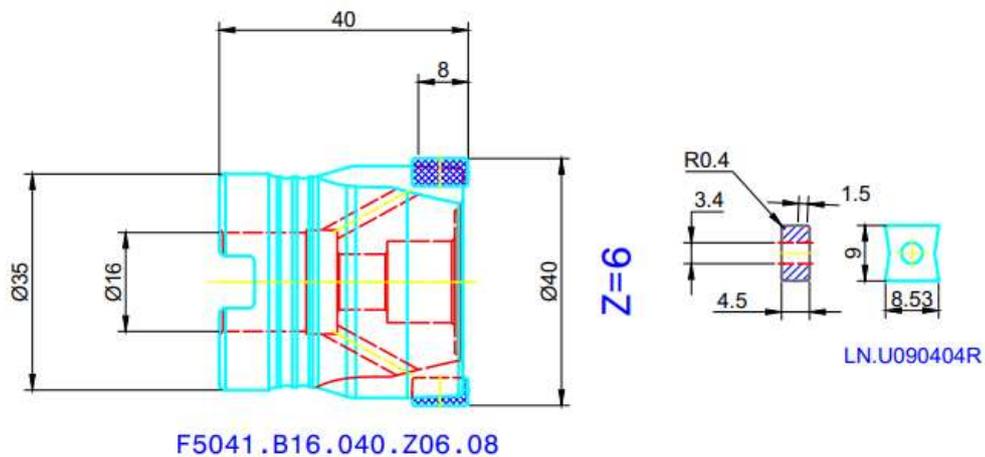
Milling tool F5041.B16.040.Z06.08
